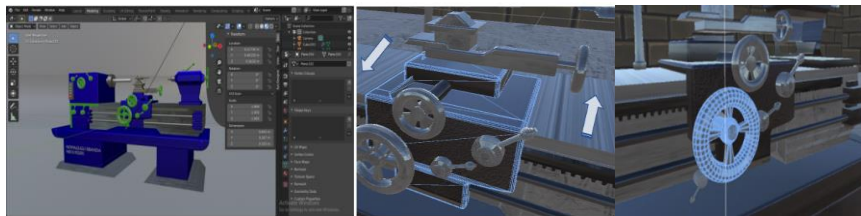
Lathe Machine 3D Model Developed in Blender Cross-Feed and longitudinal Feed for the lathe machine
